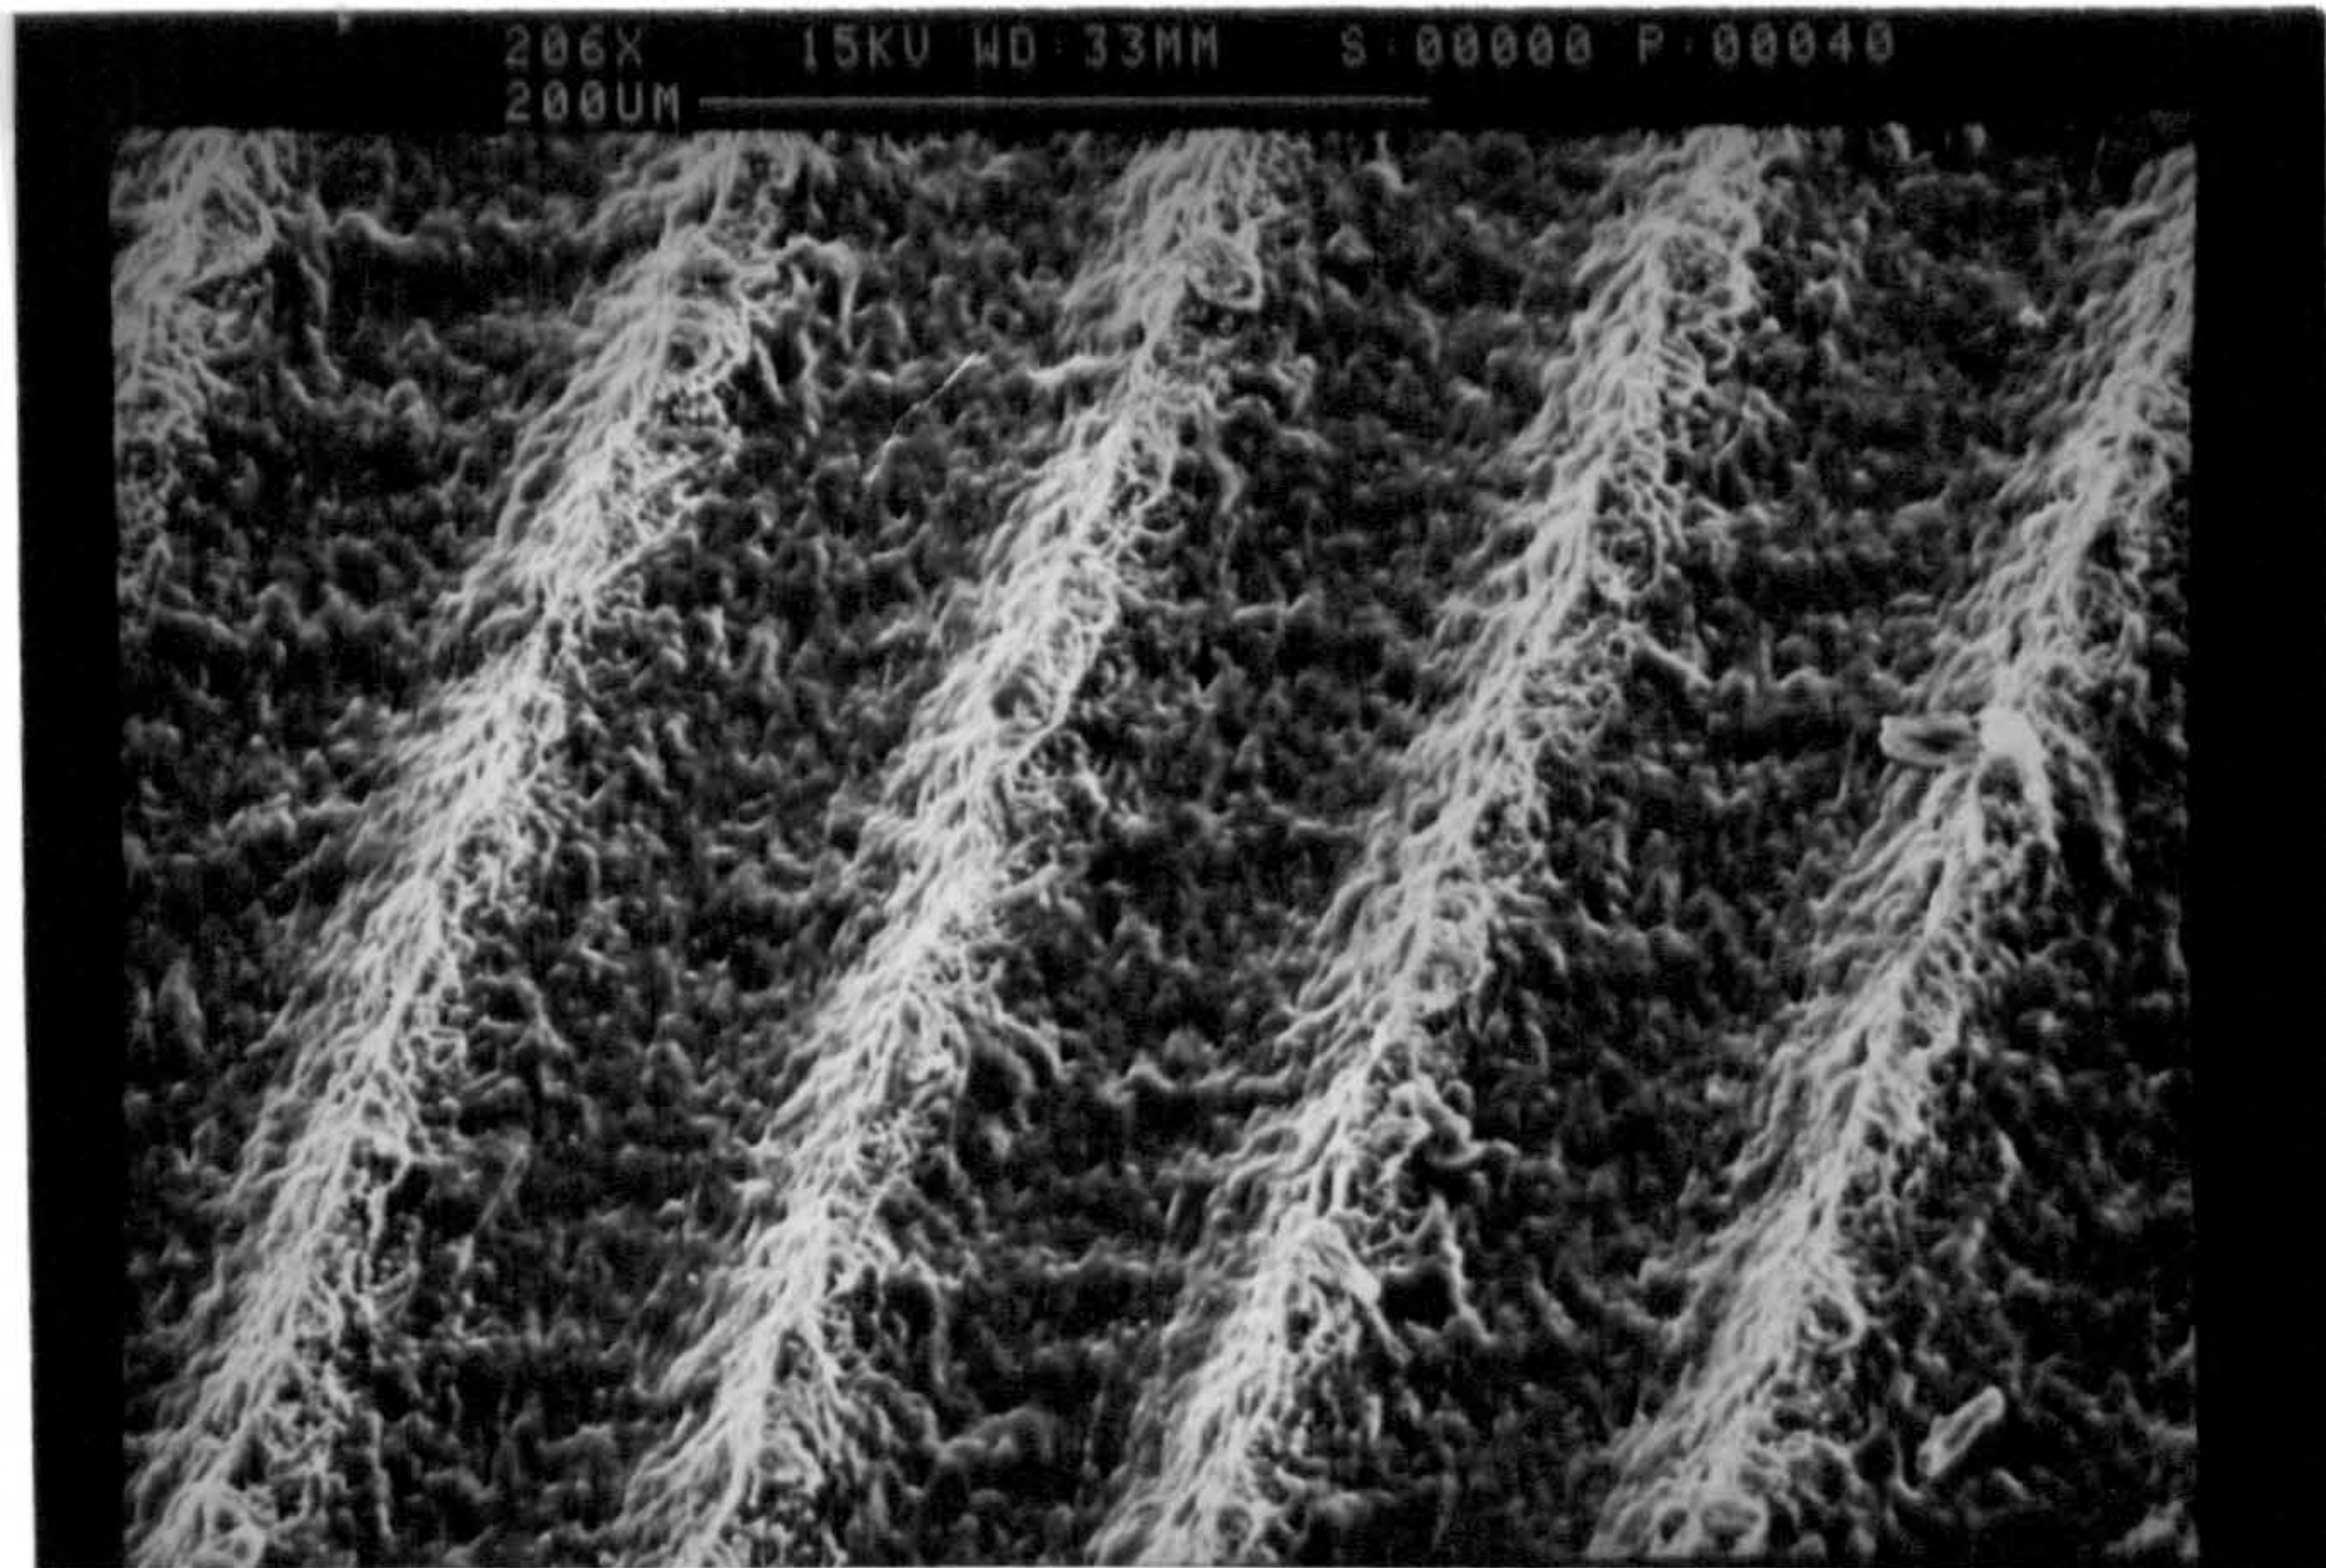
PVC surface machined at  $0^\circ$  rake angle, showing good surface quality. (Speed = 150 m/min, feed = 0.14 mm/rev)
